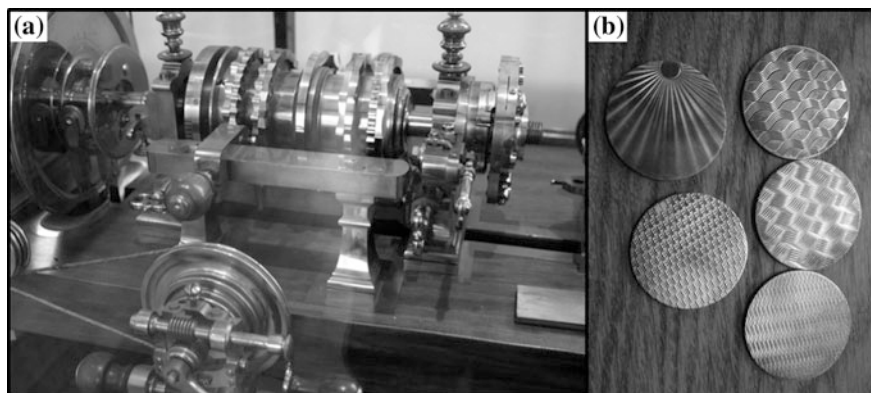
a Rose engine lathe [28] and b Guilloché patterns [29]
